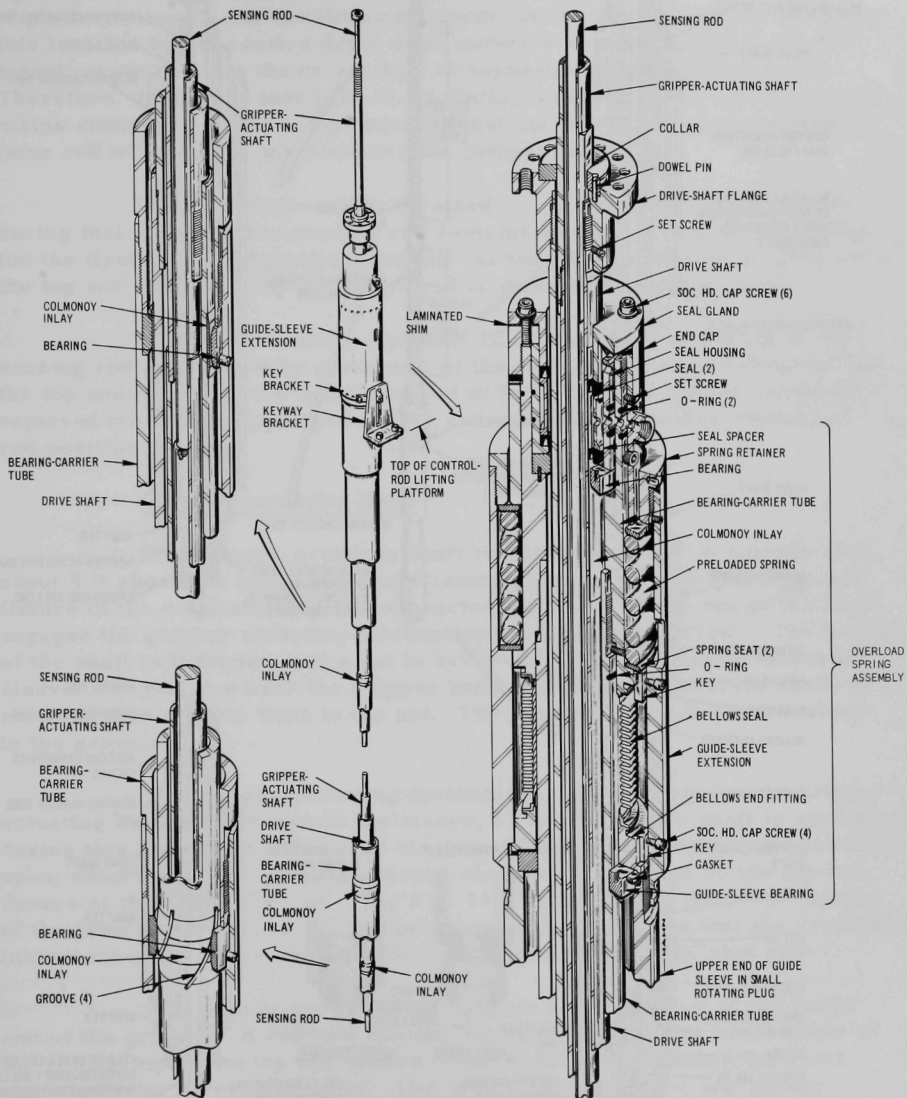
Upper Part of Drive-shaft Assembly for Oscillator Rod
